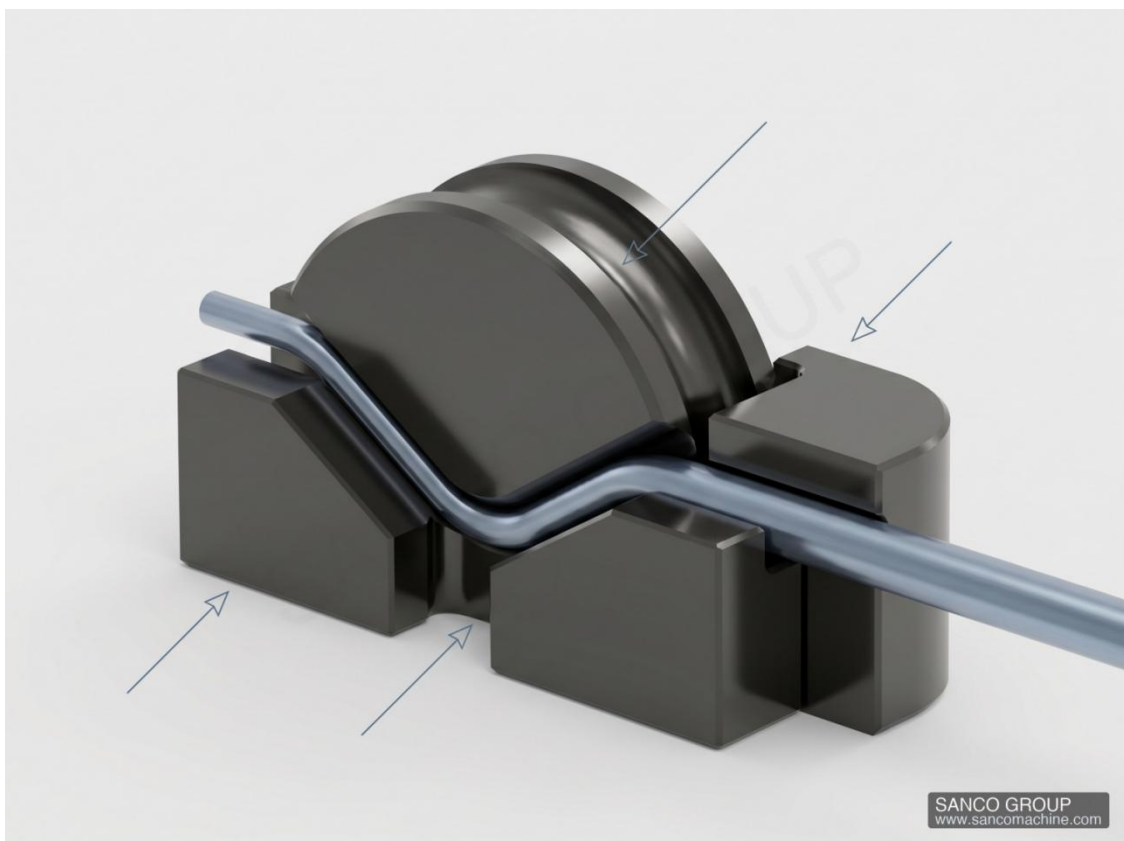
Cross-sectional Rendering of C12 Carbide Bending Die (Including Bending Die, Clamping Die, and Pressure Die Set) — © SANCO GROUP · www.sancomachine.com
